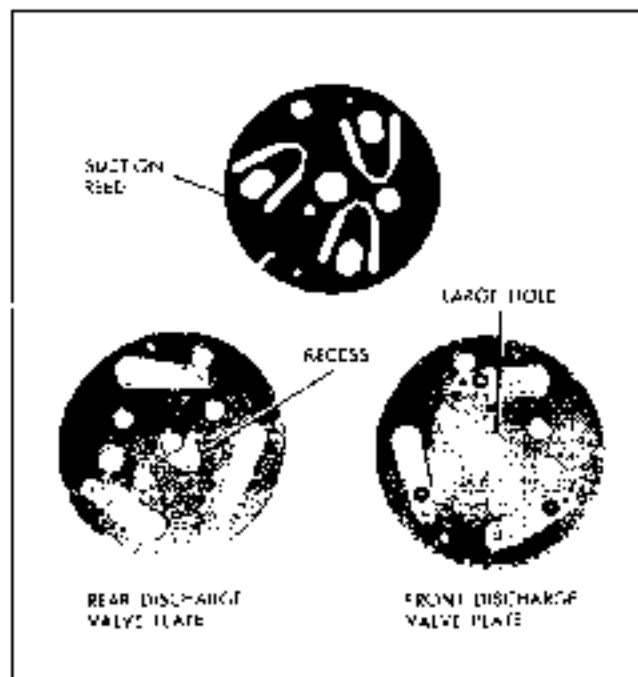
A-39 Identification of Front and Rear Discharge Valve Plates
